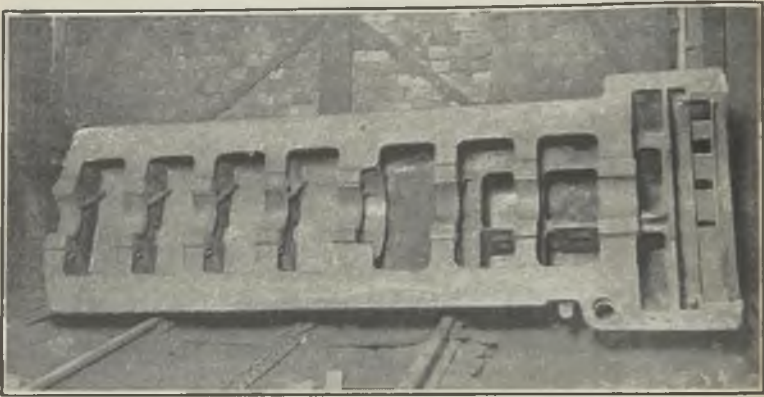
INTERNAL ASPECT OF CASTING SHOWN IN
